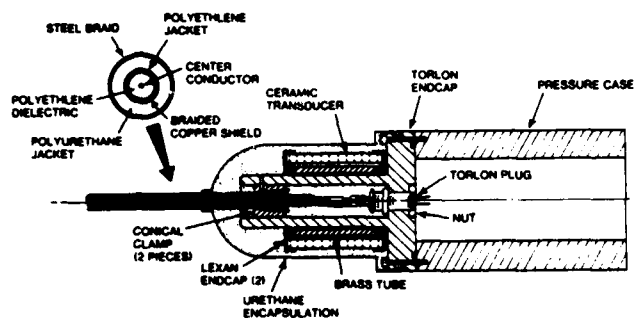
Cross-section of hydrophone end-cap assembly showing electromechanical termination. Roll pins transfer load from outer conical sleeve to torlon stem.
